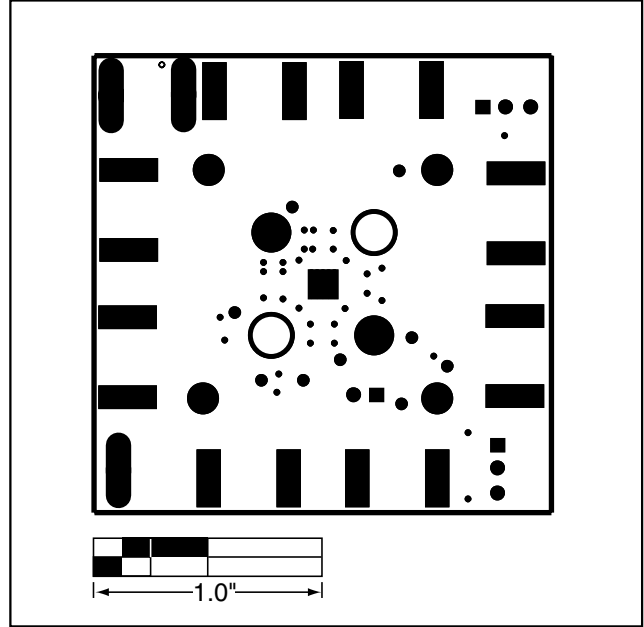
MAX3800UGJ EV Kit PC Board Layout—Solder Side
